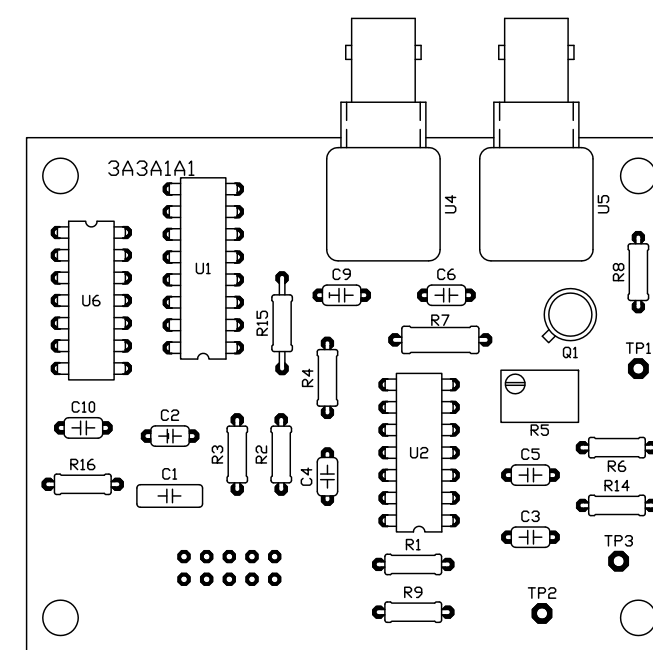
Modulator Pulse Assembly UD3A15 Components Removal/Installation (Sheet 5 of 6)
